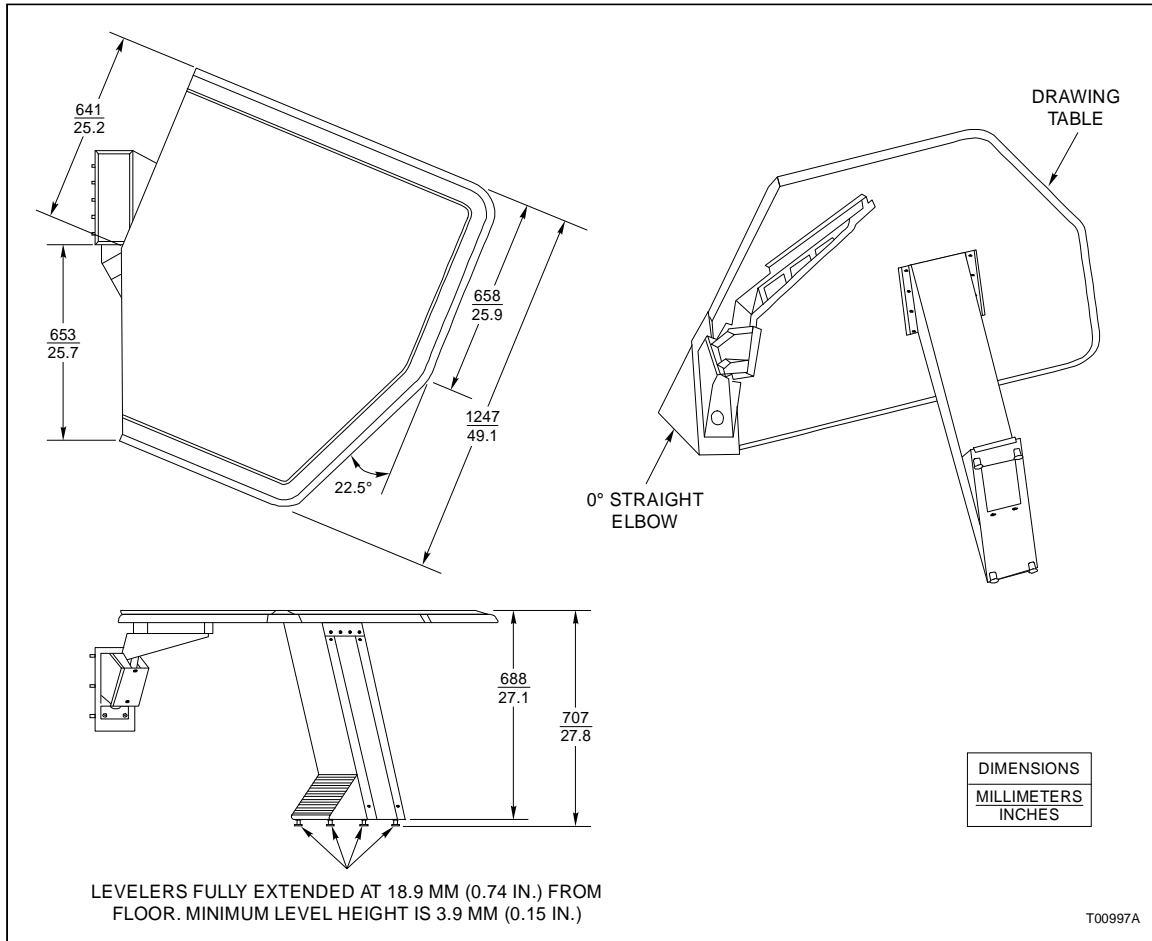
Drawing Table without Bookcase and Wedge Table Dimensions
